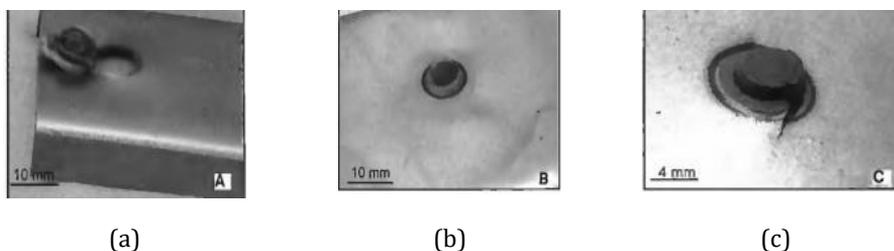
(a) Plug type fracture mode for tensile shear (b) For cross tension specimen. (c) Interfacial fracture mode for cross tension specimen [50]
